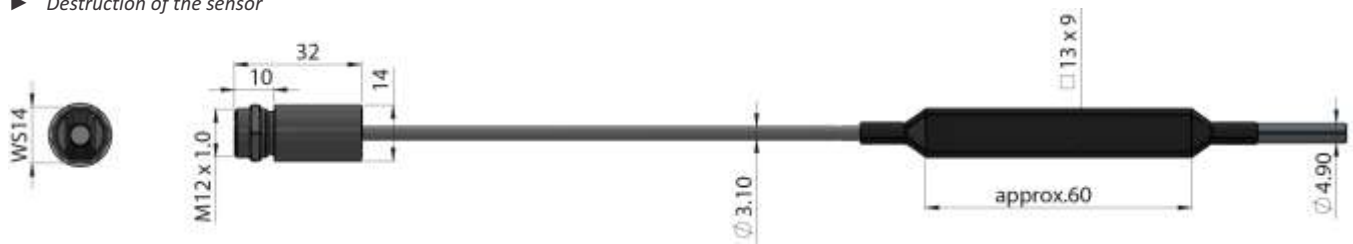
Dimensional drawing Edge Lite, dimensions in mm (inches, rounded off)
